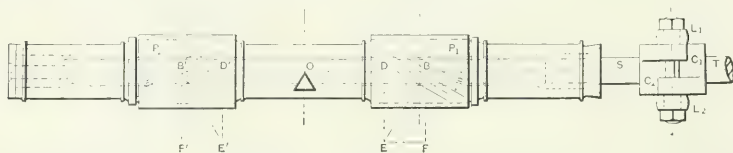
SKETCH OF PINIONS AND SHAFT OF MELVILLE AND MACALPINE REDUCTION GEAR
